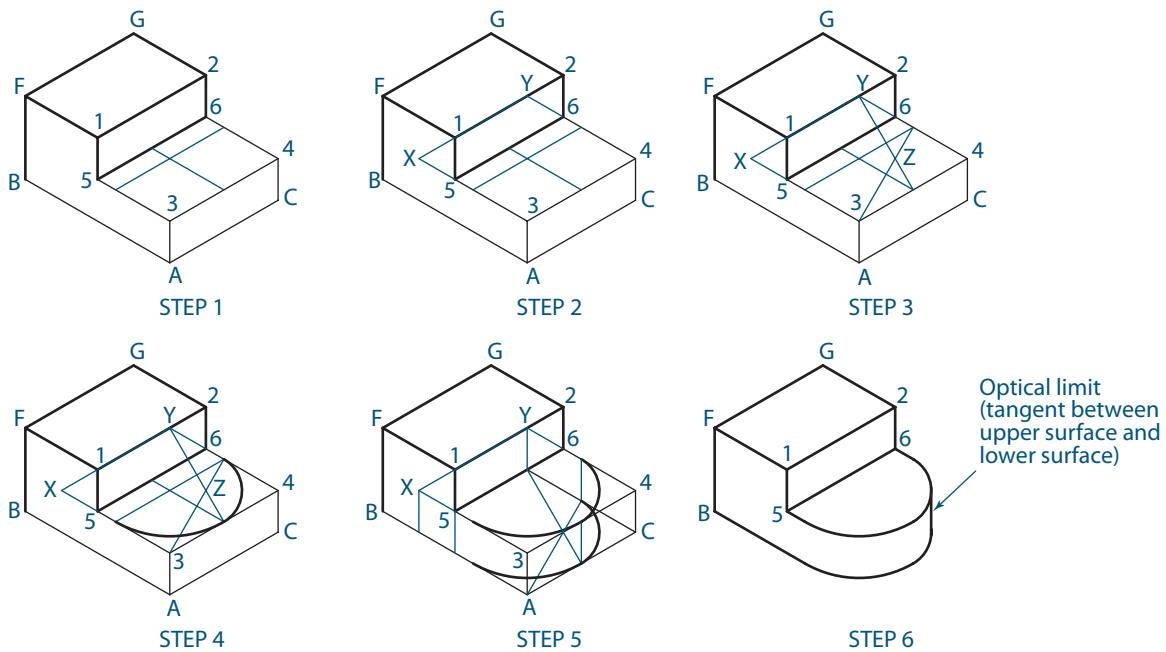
shows the orthographic views of a step block that has one of the surfaces represented by a semicircle. When drawing the isometric pictorial of this object, you need to incorporate the techniques involved in drawing an ellipse; but you are going to draw only half of it. Construct the isometric drawing of the step block shown in Figure 9.08. Figure 9.23 illustrates the technique required to draw the lower semicircular surface.
